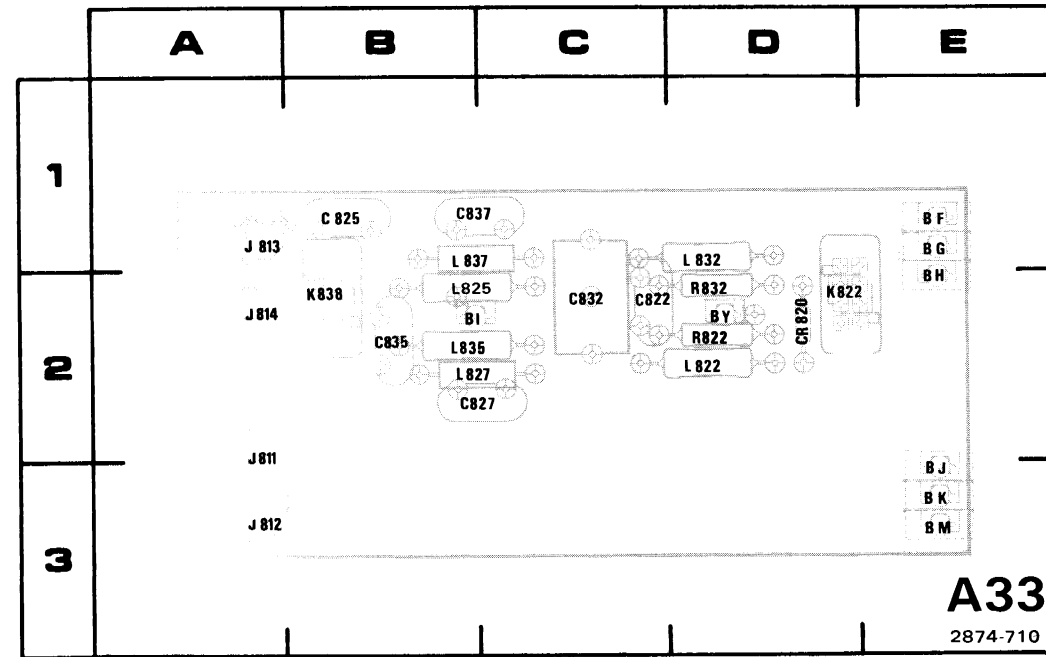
A33—X-Y Compensation circuit board assembly.
